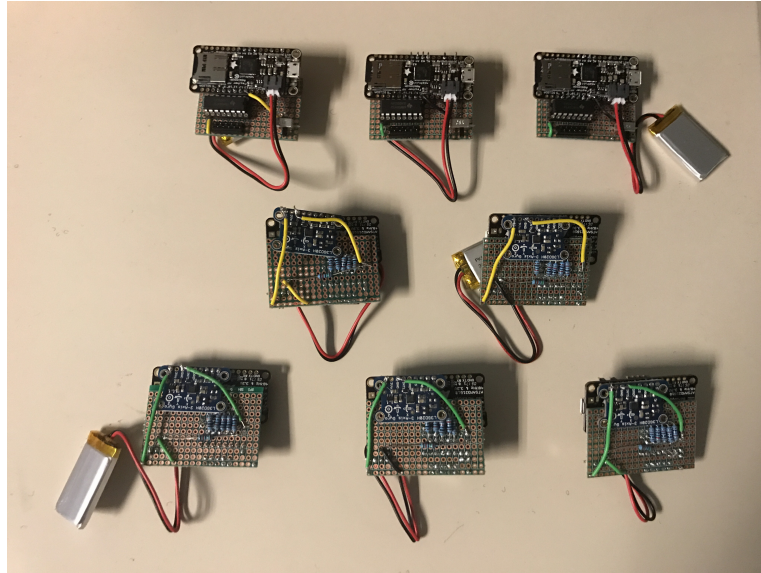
One group of boards I fabricated for this study. Front and back of the boards are pictured, with attached battery.
